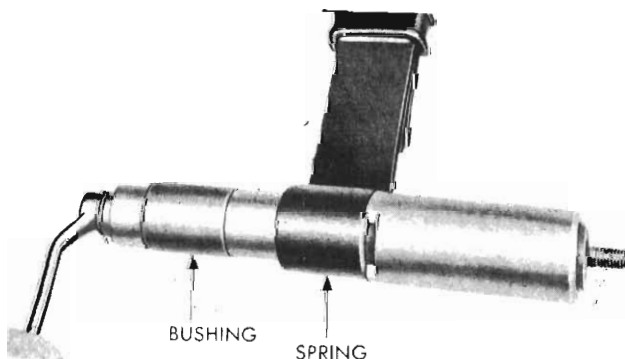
Removing and installing spring bushing (Tool E17C10A).
